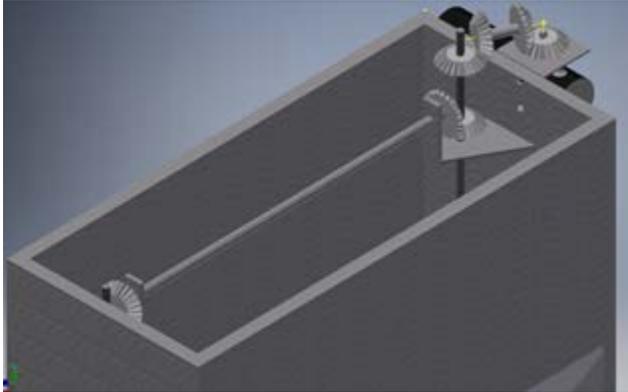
Proposed Solution: bevel gears and rod. This solution was not chosen because of the many moving parts required. The torque requirements for a motor would also be high compared to other solutions. The parts involved in making this solution are also very expensive.
